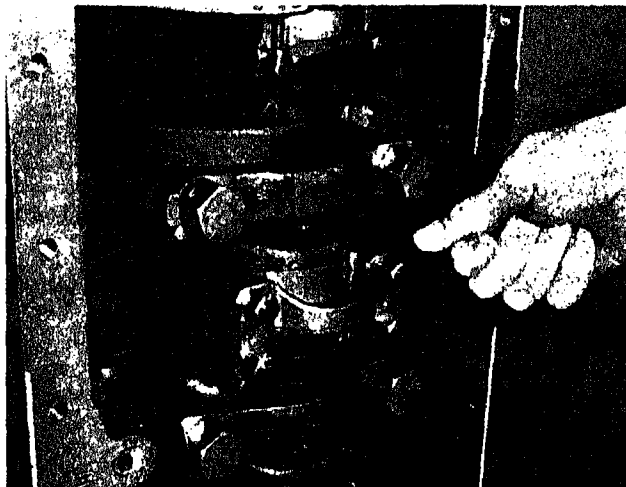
Checking rod-to-crankshaft side clearance
